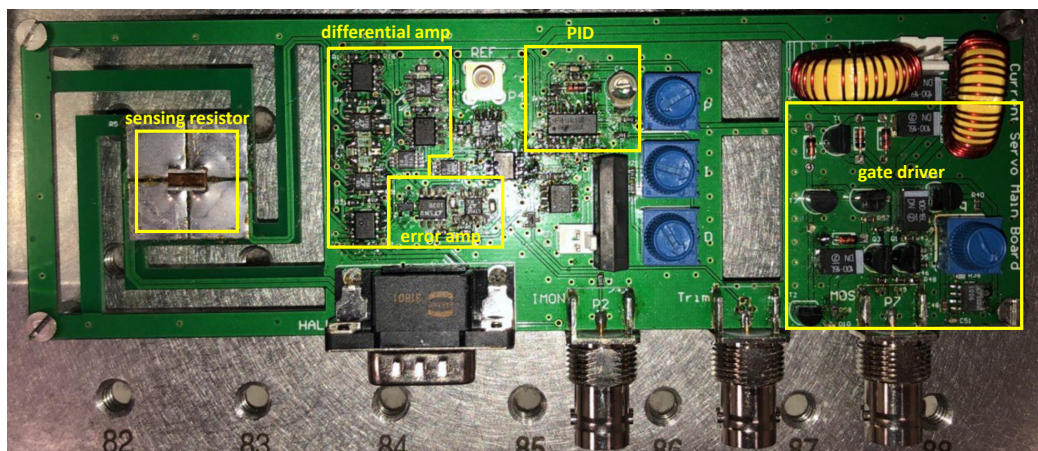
The PCB layout of the servo board for magnetic field system.
